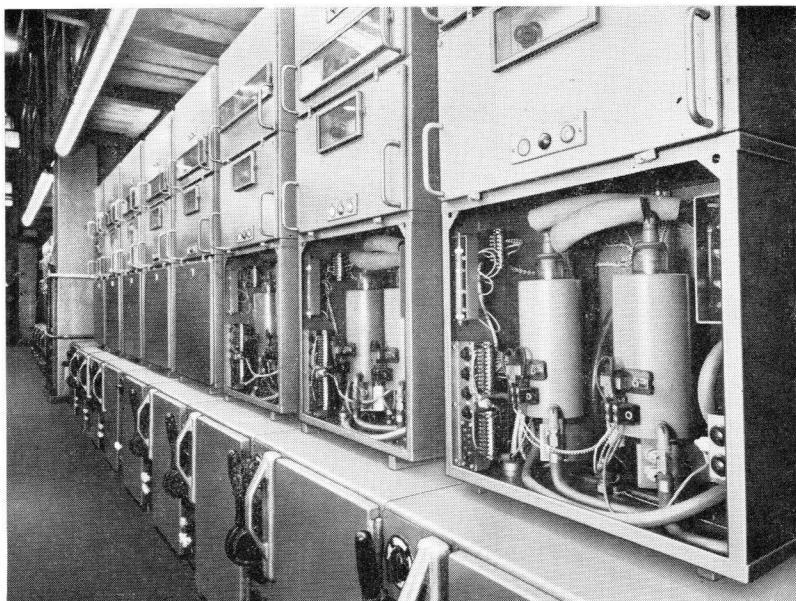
(a) Large electronically controlled welding installation showing location of ignitrons;
